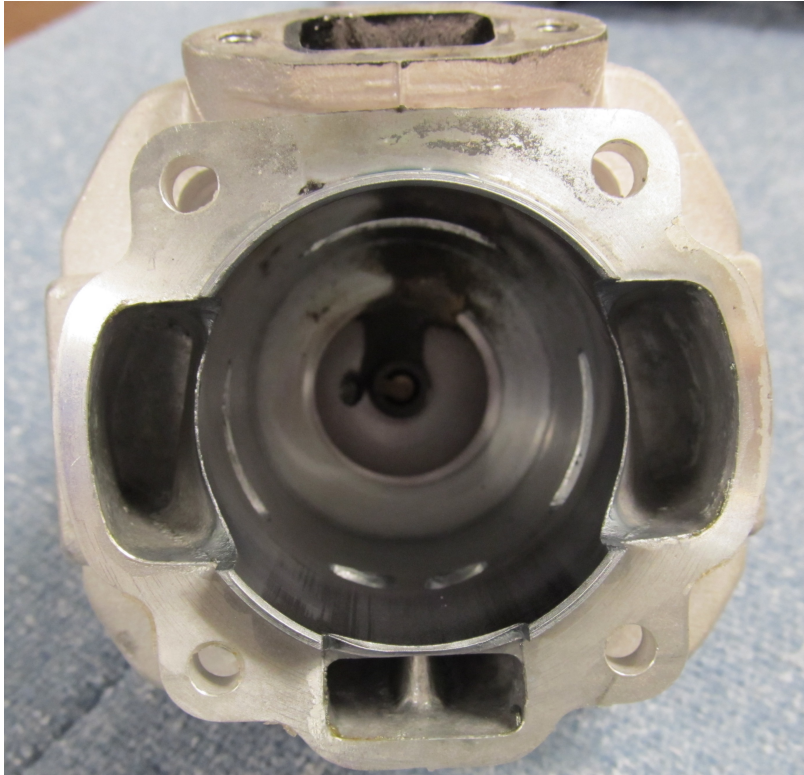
Combustion chamber marking of 3W-55i Engine #2 with Kistler spark plug installed
